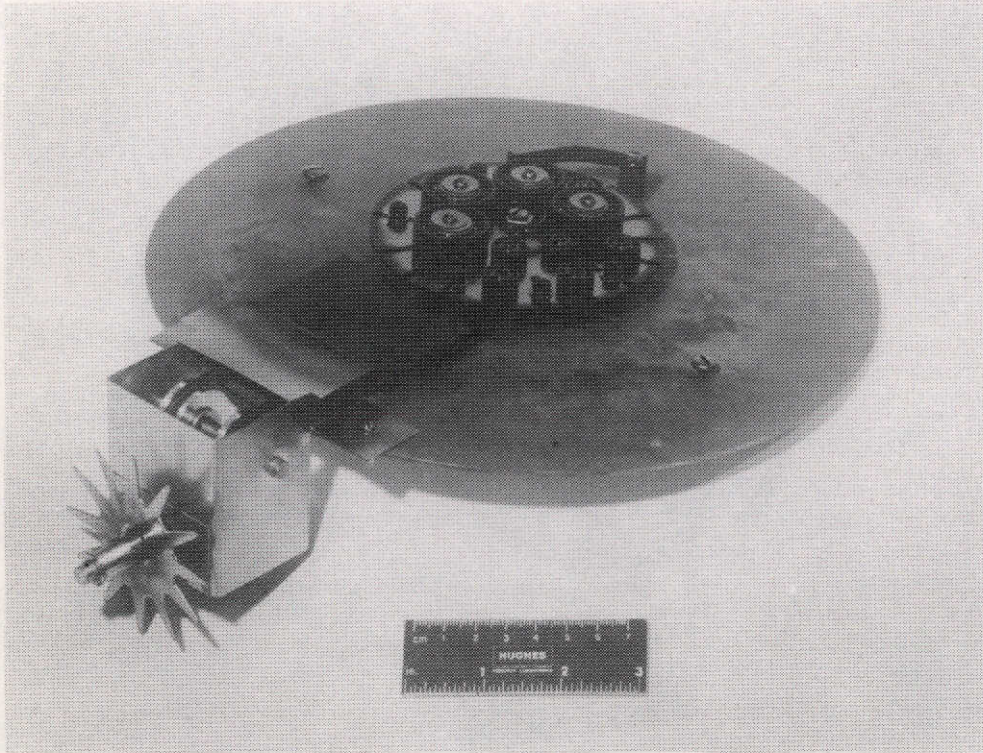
Rotating fixture for sputter deposition of MoS_2 on ball bearing assemblies.
